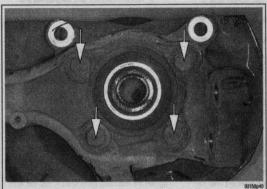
To remove the hub and bearing assembly, unfasten the four retaining bolts . . .
